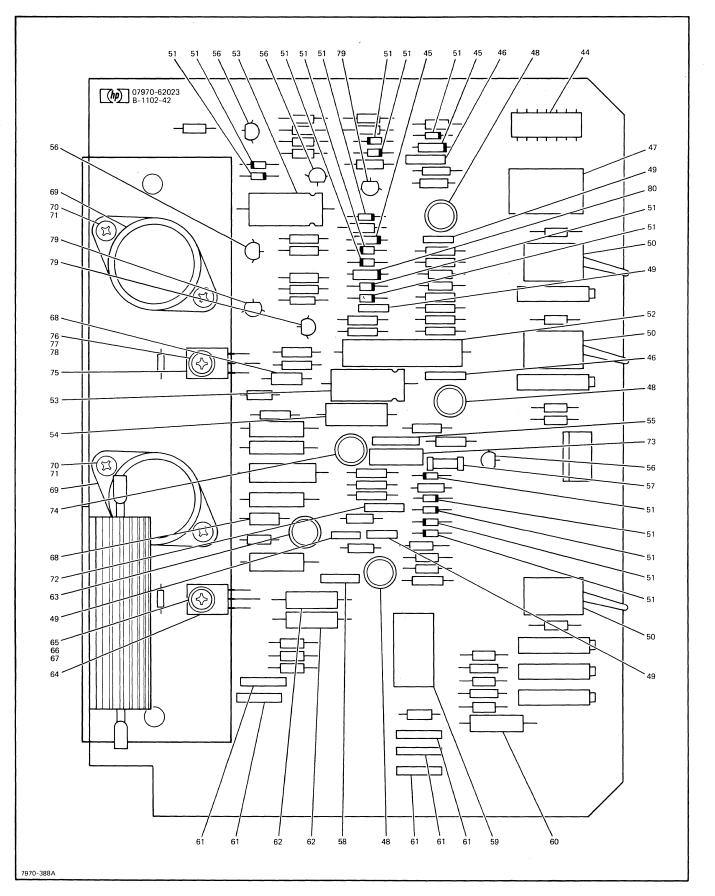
Capstan Servo PC Assembly A9 (Sheet 2 of 2)
